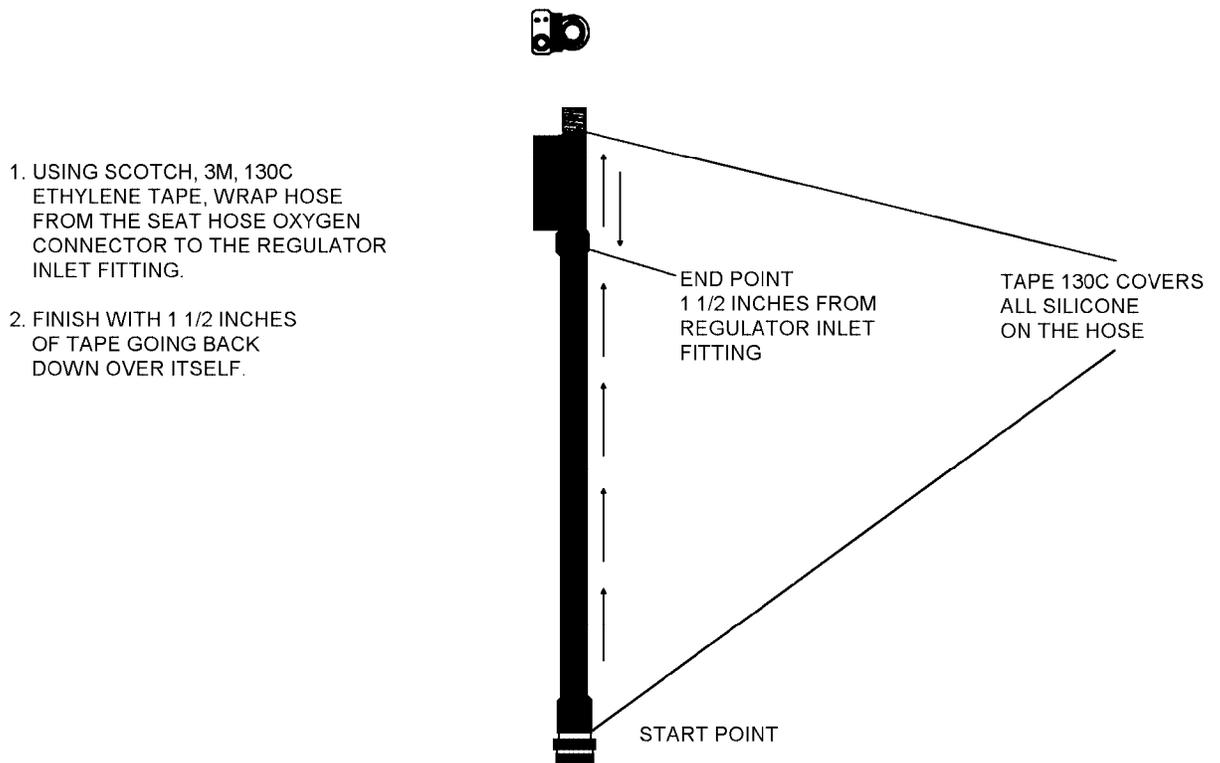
Unmodified Regulator to Seat Kit Hose Assembly Taping
